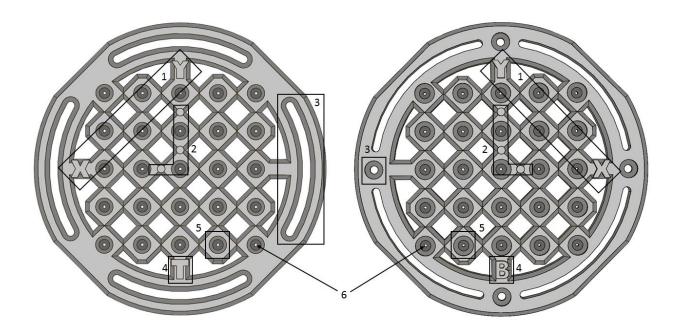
Labeling parts of the top (left) and bottom (right) plates. 1- Positive X and Y axes. 2- Fiducials. 3- Column inserts. 4- Top or bottom plate indicators. 5- Innerpost insert. 6- Wire clearance hole.
